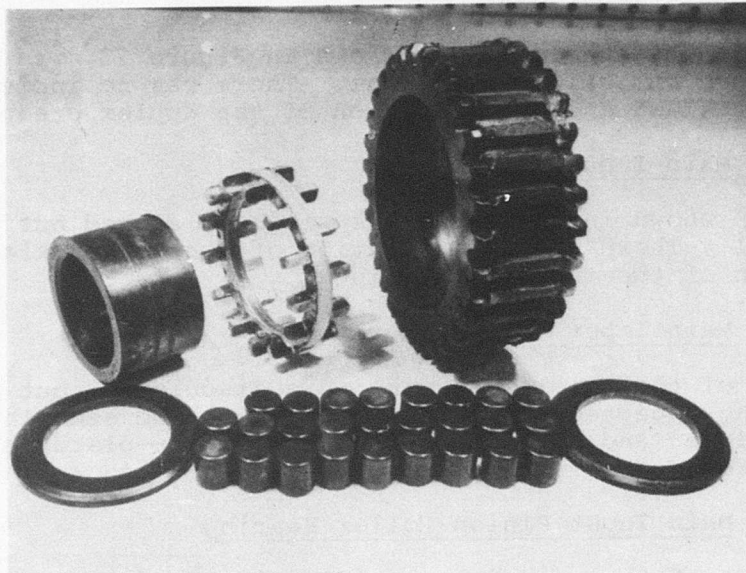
Lower planetary pinion, retainer, thrust washers, rollers, and races for 4.0-hour emergency lubrication run.
